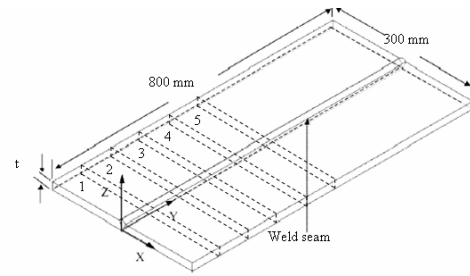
Geometry of welded plates and transversal joints.
